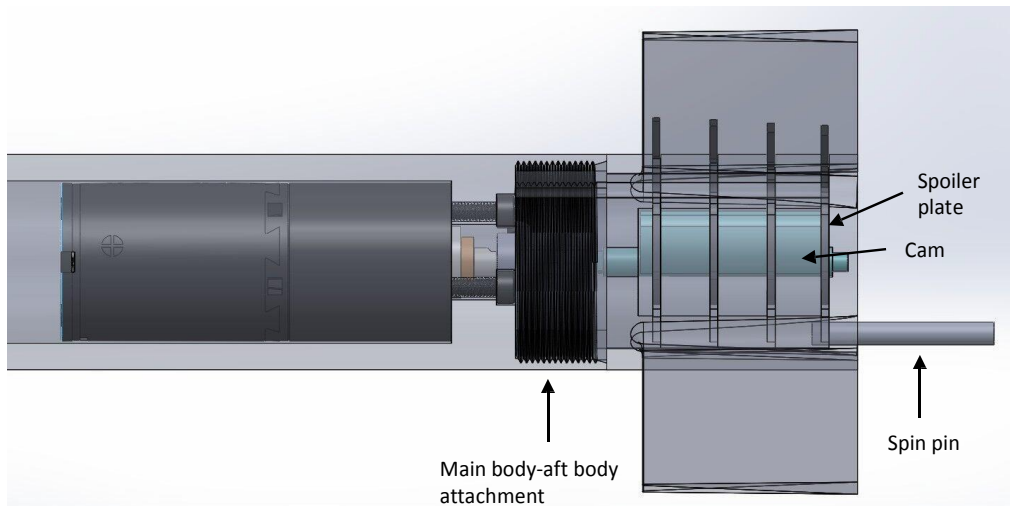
CAD Side View of Integrated Projectile (Rear Zoom).
